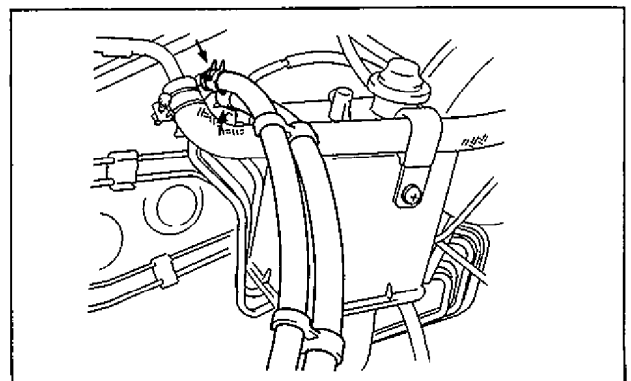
C-5 Fuel Lines Inspection (for Electronic Fuel Injection model)
